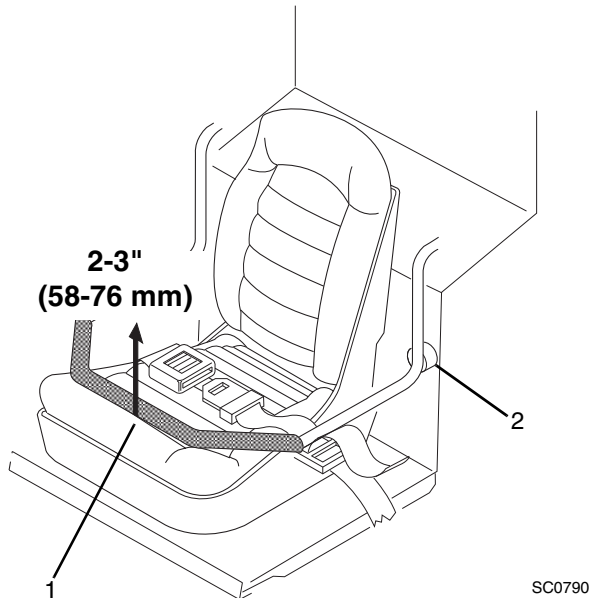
Loader Arm Lockout Micro Switch Adjustment
